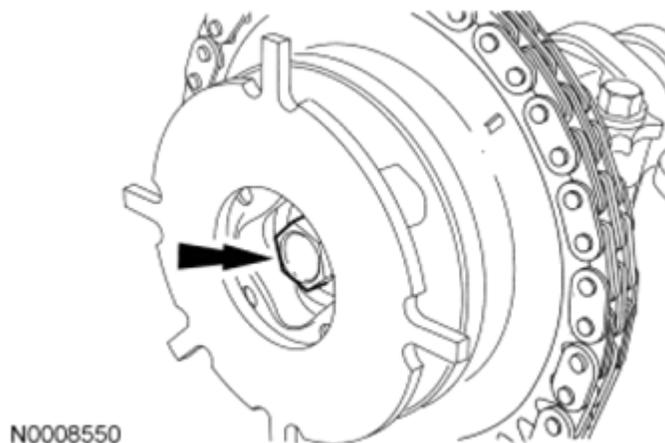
Locating Camshaft Phaser And Sprocket Assembly Bolt
